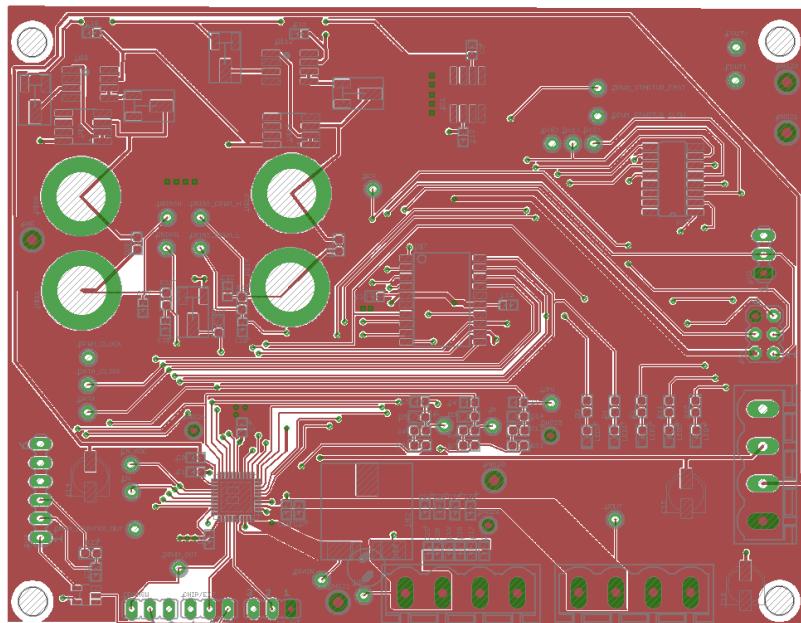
Converter PCB layout, top copper, silkscreen, and solder stop layers.
